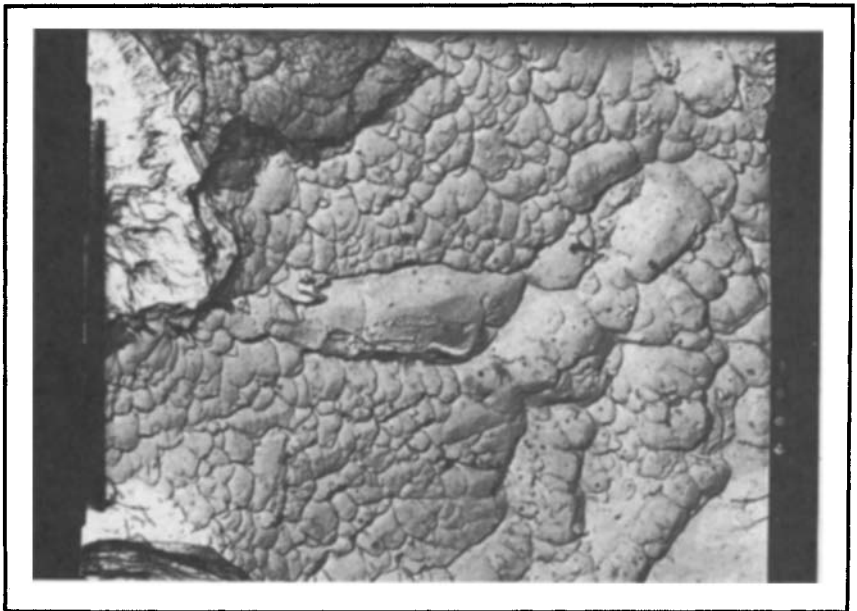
TEM replica imaging of tensile fracture in A357 casting (6550 \times). (Courtesy of Boeing Commercial Airplane Co.)
